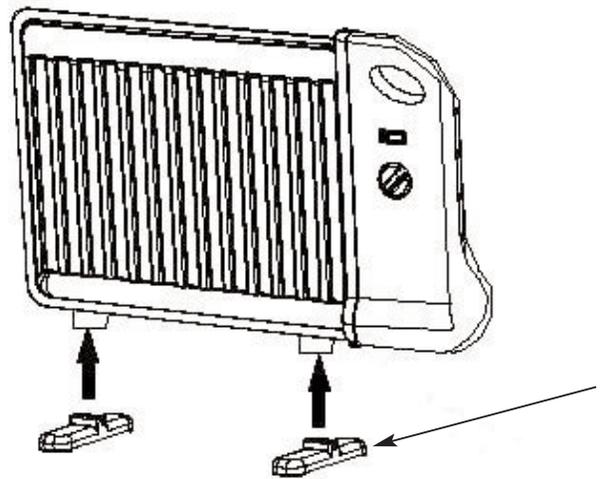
Repair Parts Illustration for Oil-Filled Flat Panel Heater
